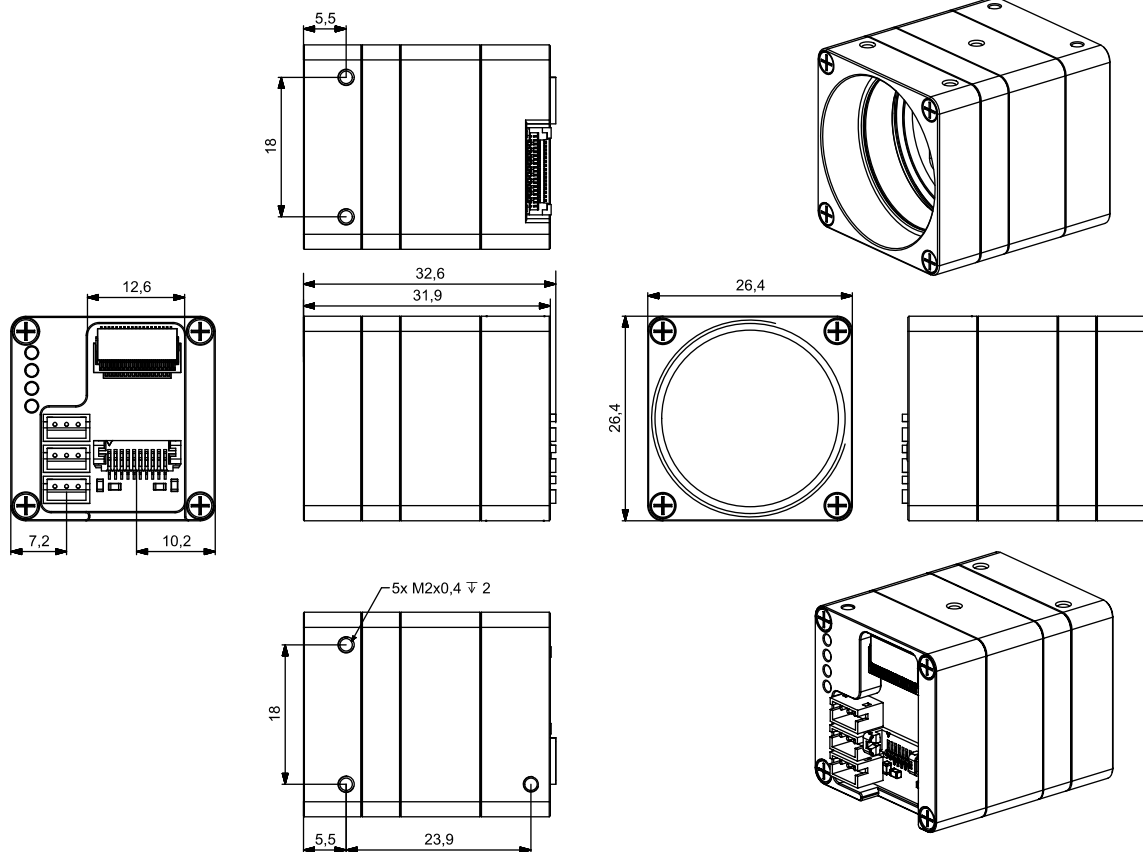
Dimensional drawing of MX023/089/124xG-SY-X2G2-FF (C-mount (with C-mount module B))
